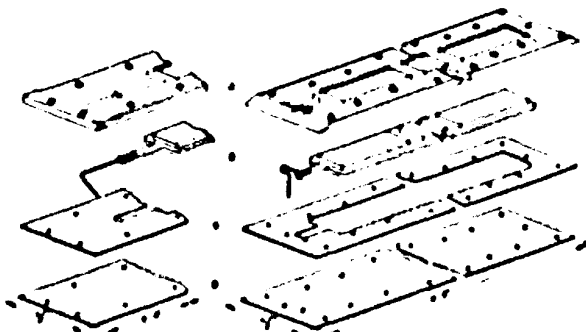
Exploded view of Mark I lead alloy anode. Cable connected to Mark II is cut off for A—Anode B—Bracket C—Polychloroprene gasket D—Backing plate
